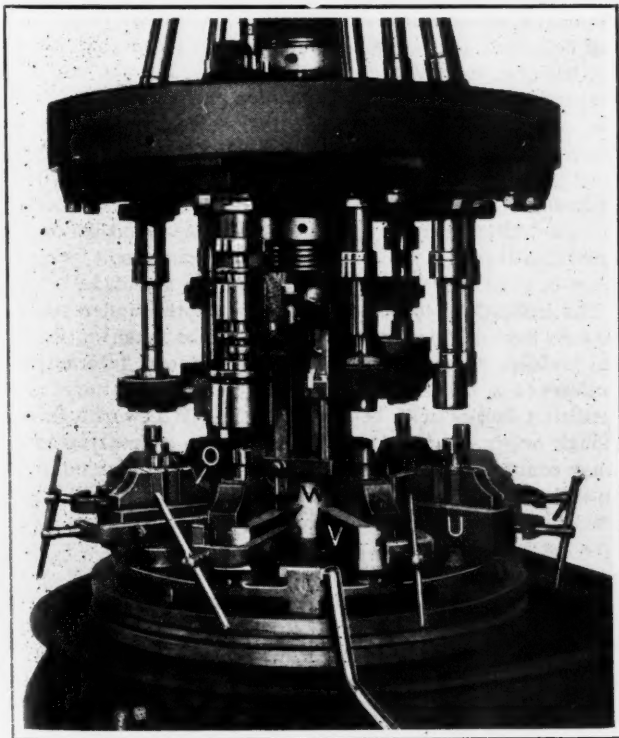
Arrangement of the Tool-spindles that complete the First Operation on the Cylinder
